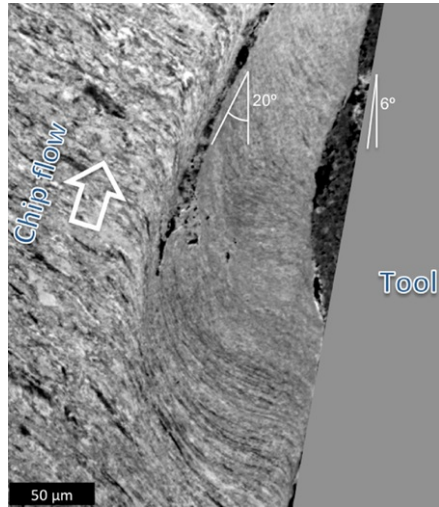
BUE attached to a chip machined at 5 m/min (tool is overlapped on image for clarification).
